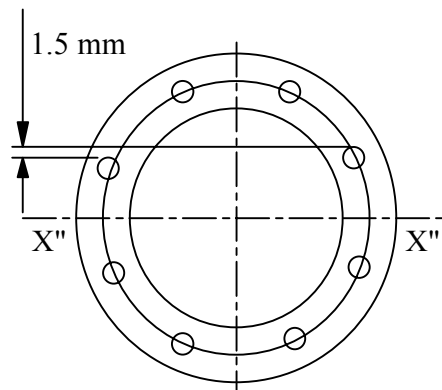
Tolerances for prefabricated piping assemblies
